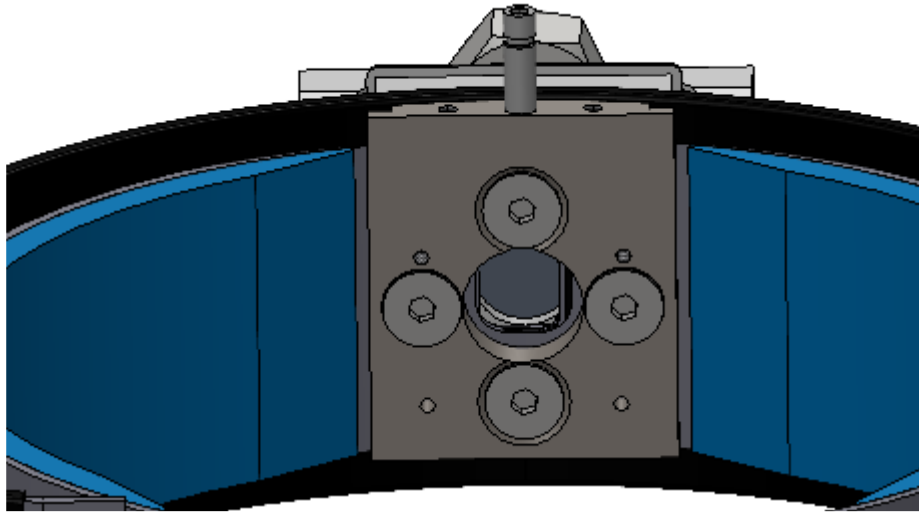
Shoulder inner rib clamp and shoulder foam pin installed
